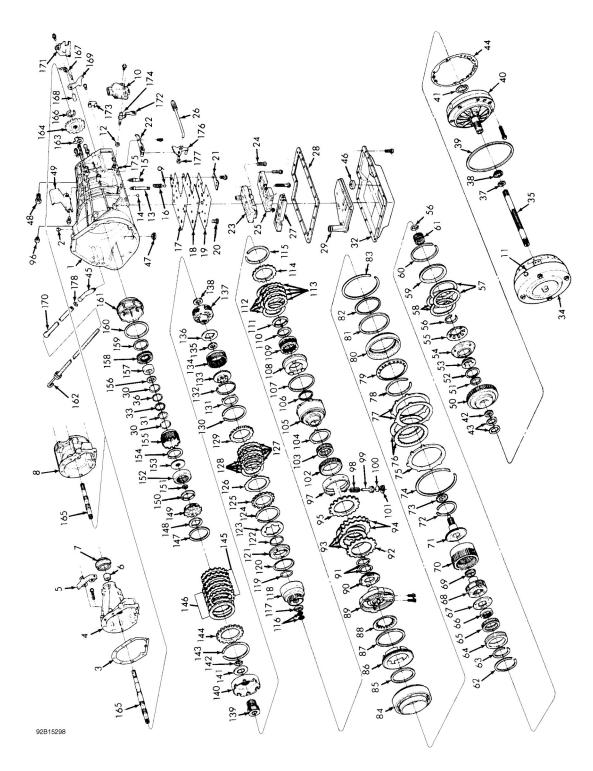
Exploded View Of E4OD Automatic Transmission (1 of 2) Courtesy of FORD MOTOR CO.
